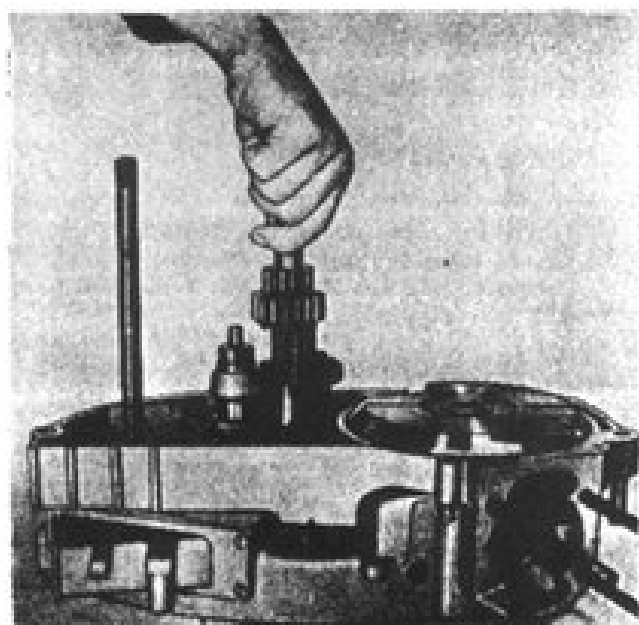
Setting the HJ-10-3 motorcycle primary shaft.
